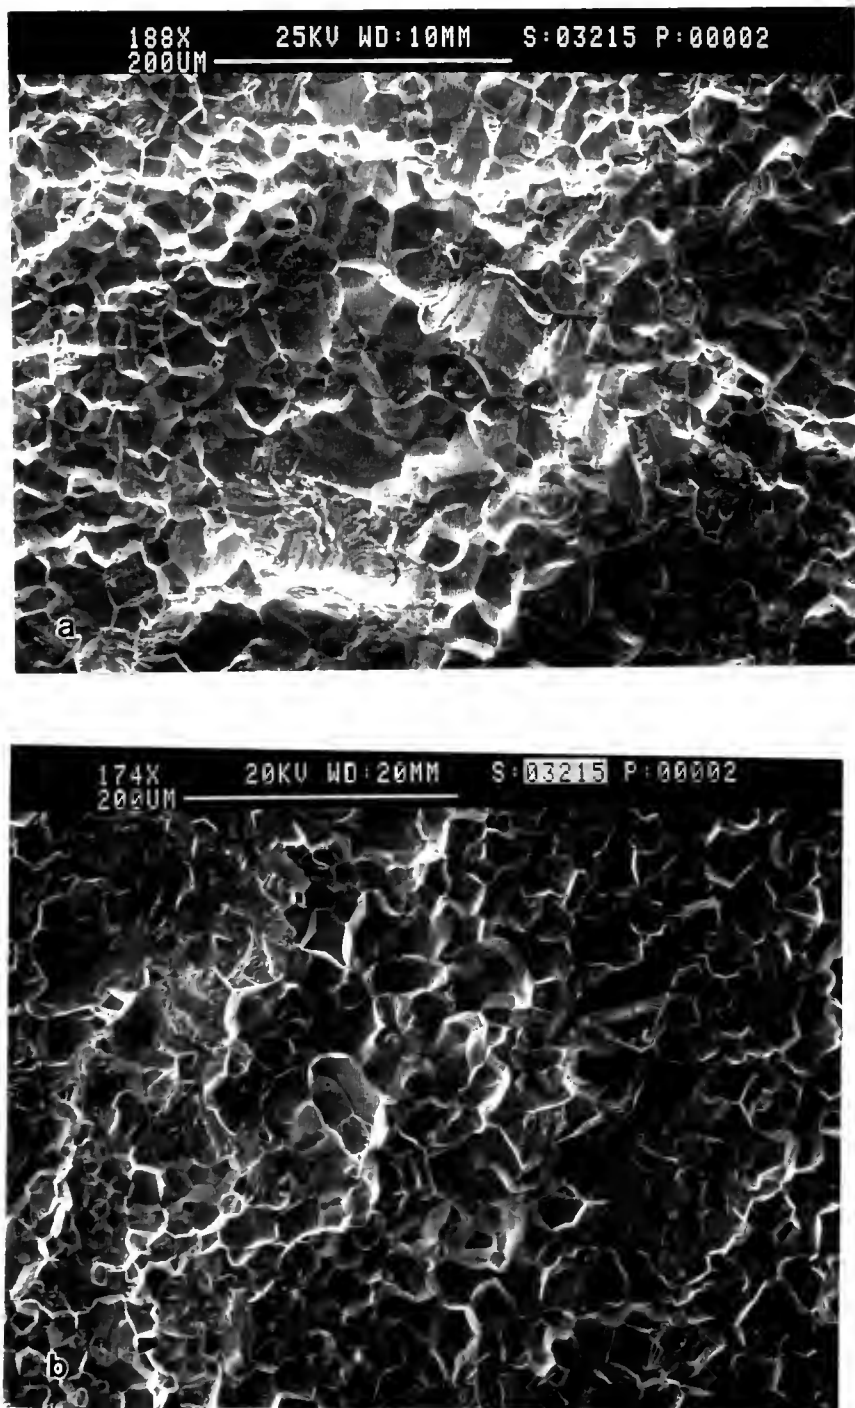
Fracture surfaces of NiAl-Ti following tensile testing at room-temperature: (a) as-extruded and (b) after annealing at 1100 K for 2 h followed by furnace cooling.
